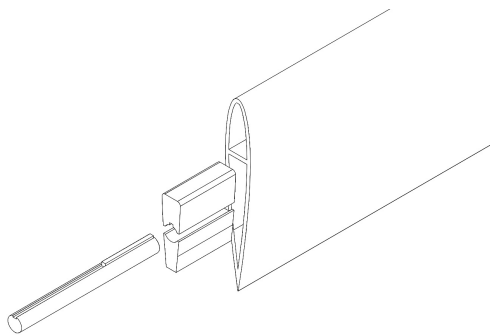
An exploded view of the airfoil vane-shaft assembly.
